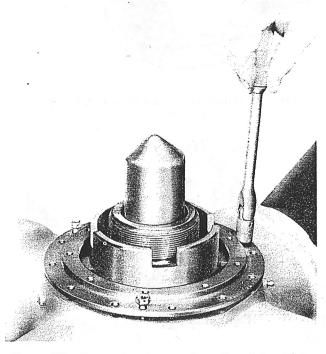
Removing Master Gear Retaining Plate (Using Bolts as Pullers)
